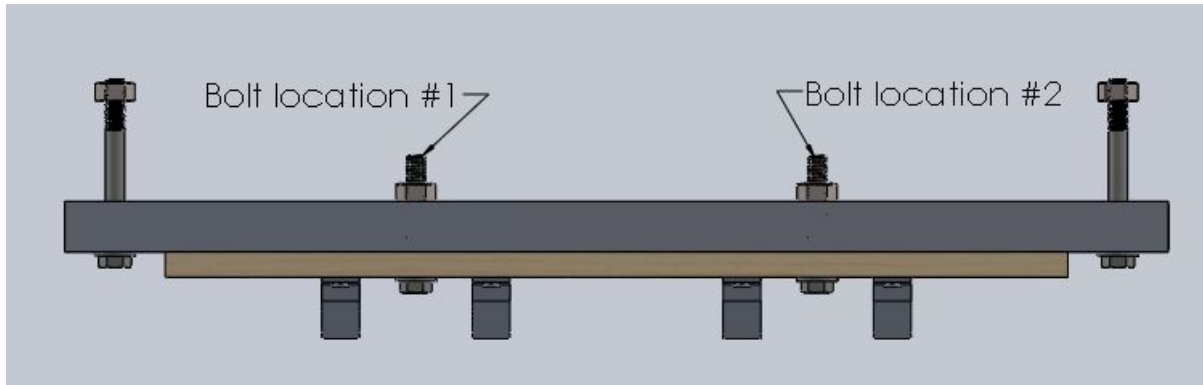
Aluminum Tubing Bolted to Wooden Platform (Top View)
